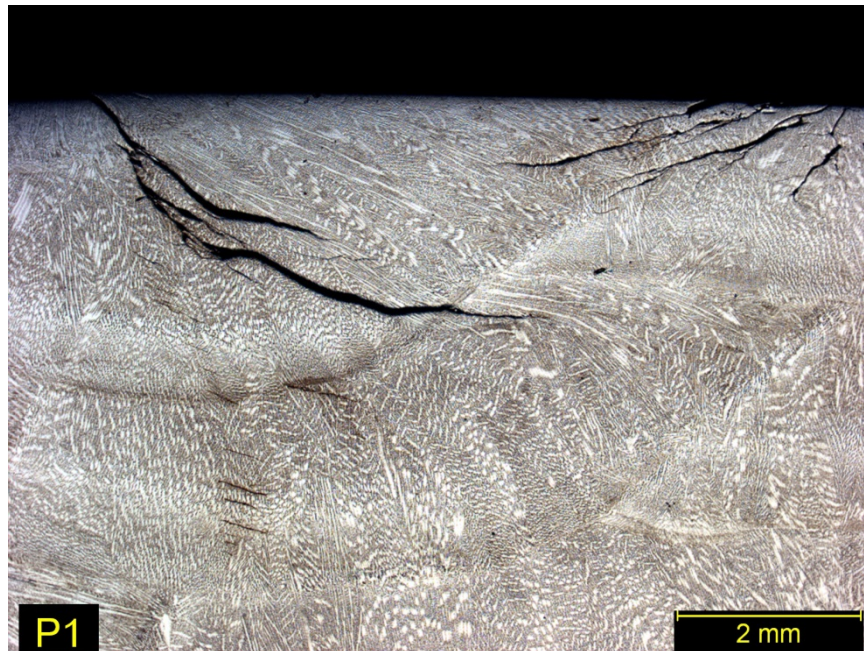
Crack in Base Material Adjacent to Weld Fusion Line
